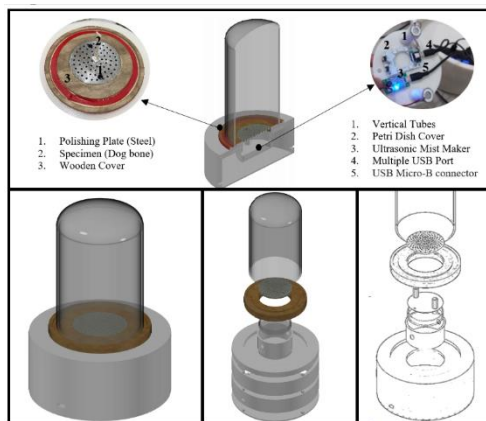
CAD Model of the Existing Vapor Polishing Device Using Mist Maker [3]
